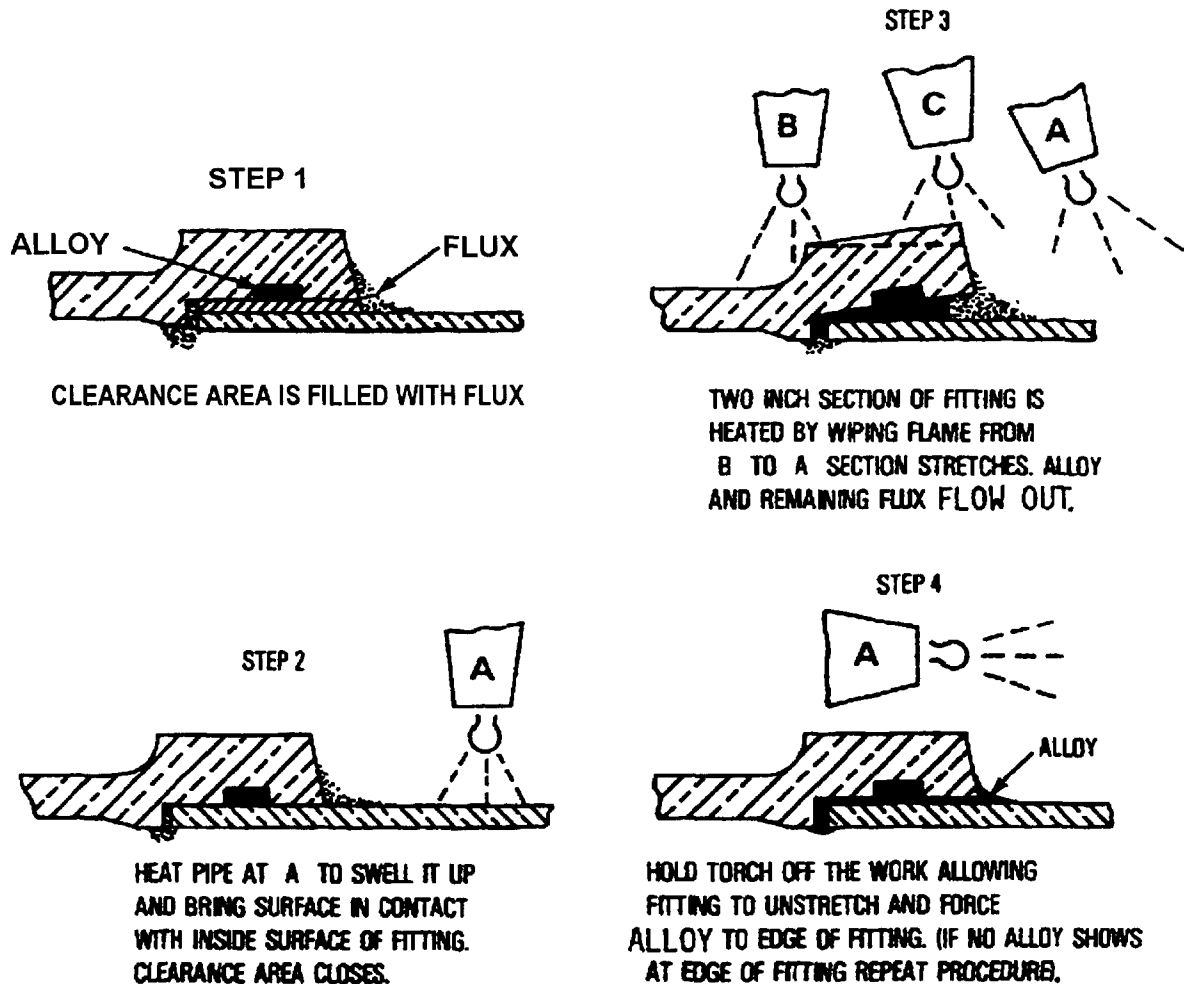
Alloy Insert Method of Silver Brazing Fitting to Tube
